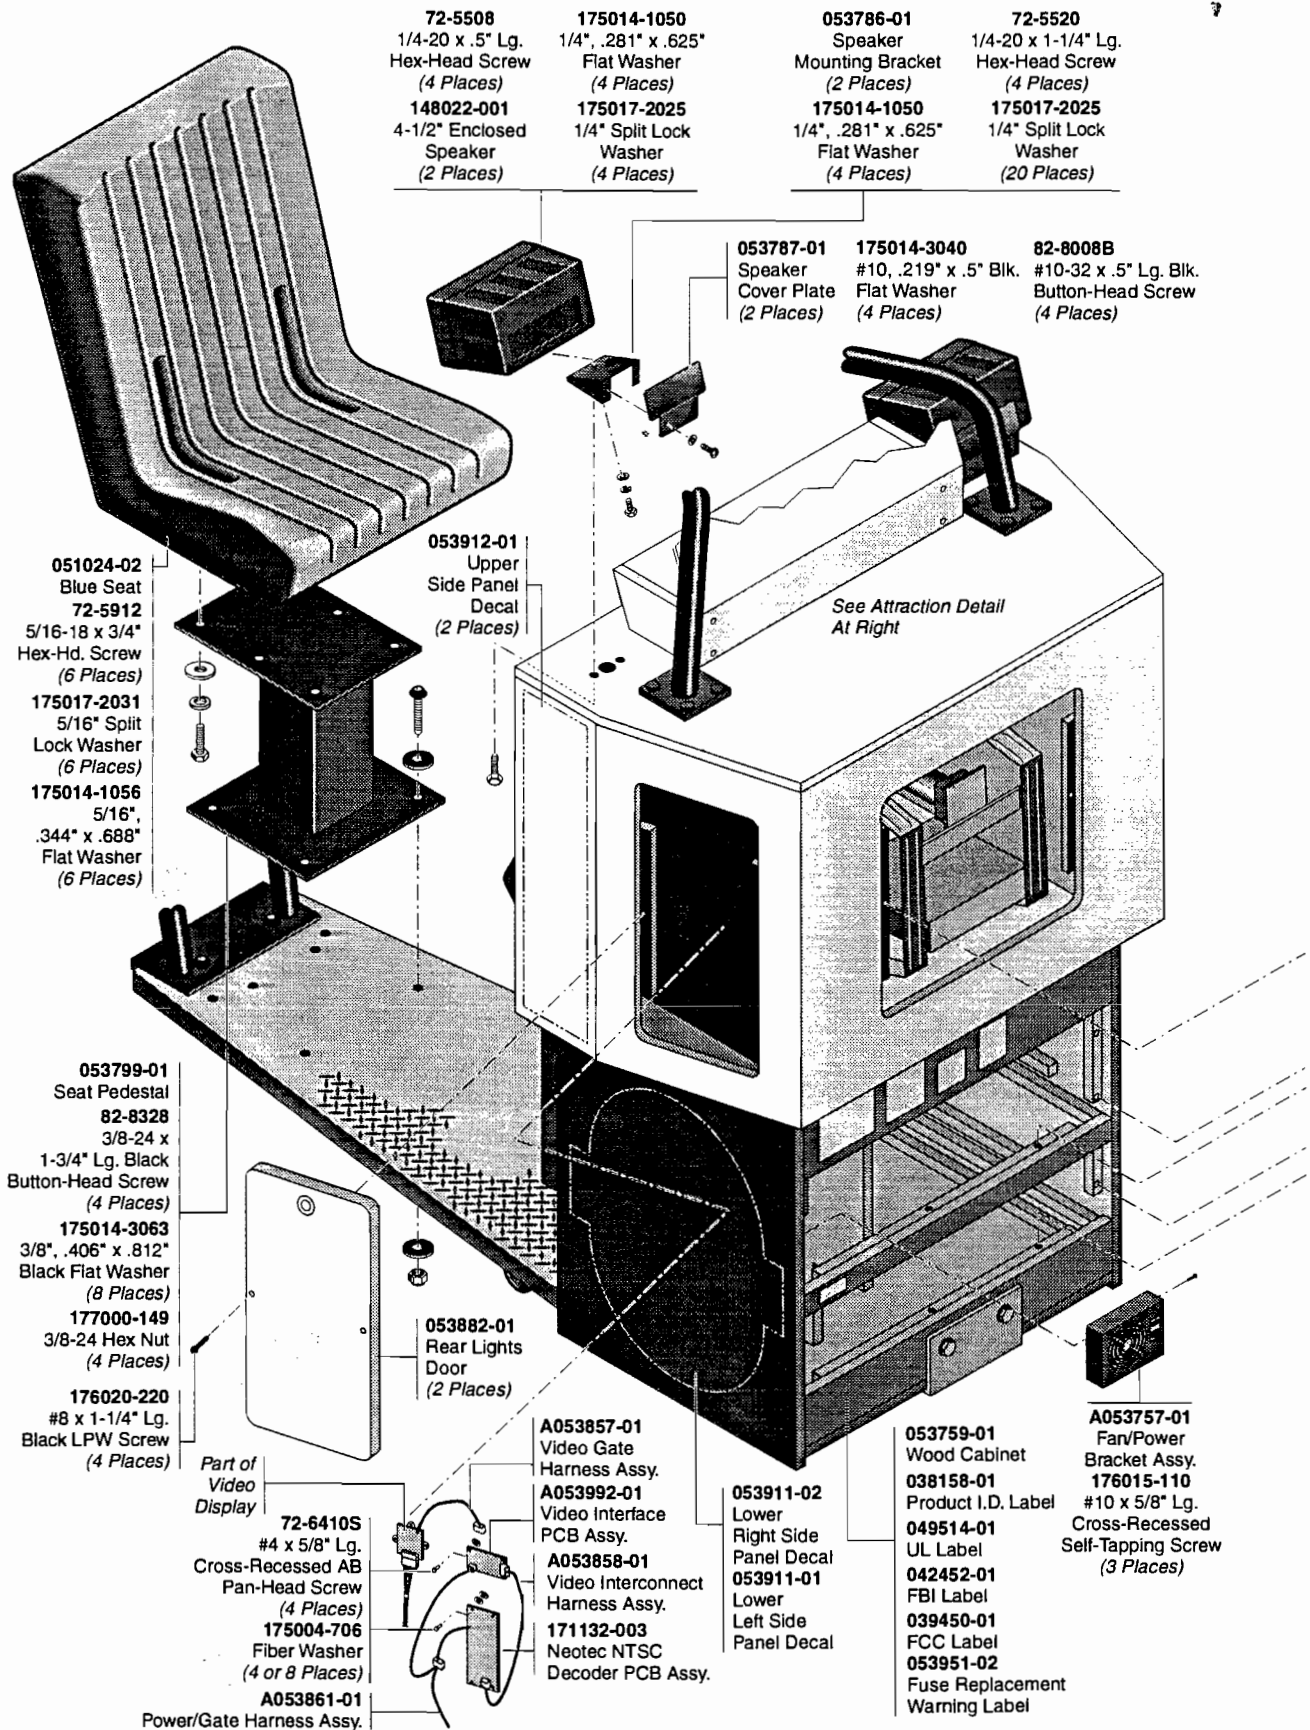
Cabinet-Mounted Assemblies, Rear View (revised)
